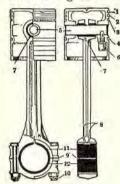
Piston and connecting-rod assembly. Names of parts are as follows:
